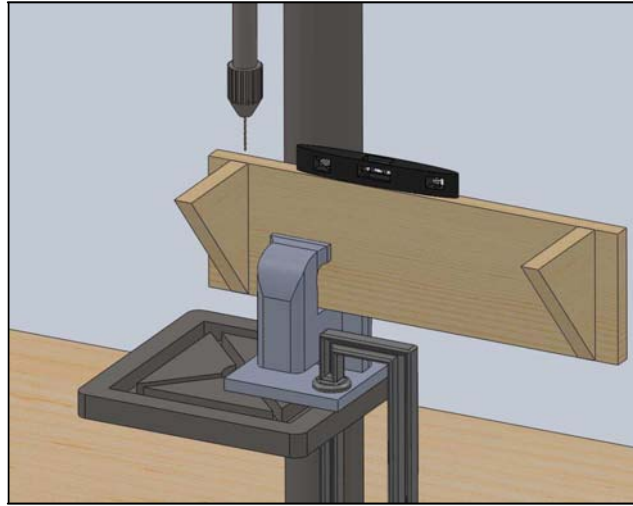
Following method of [Step 10](#), pilot holes are drilled in the bottom assembly
